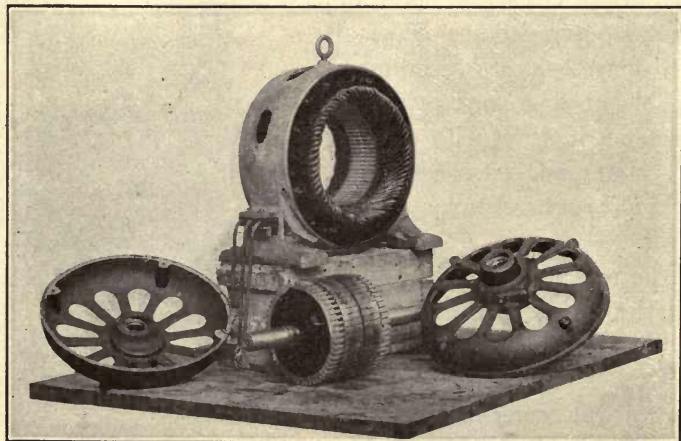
ANOTHER LARGE A. C. POWER MOTOR DISASSEMBLED. (SQUIRREL CAGE TYPE.)
